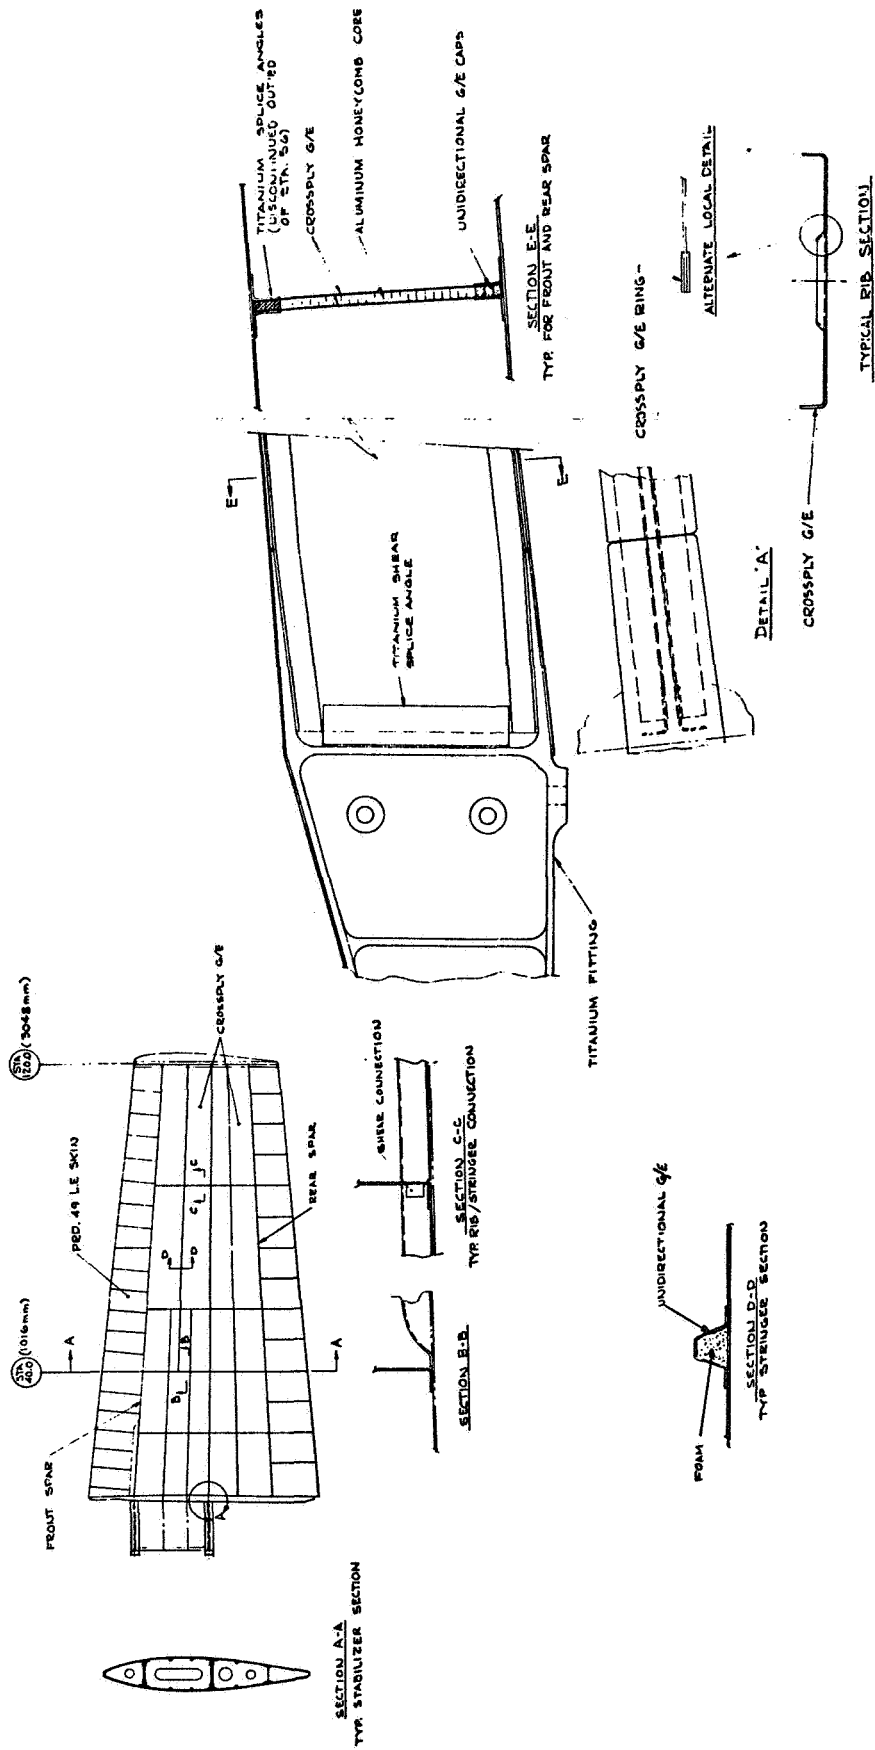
COMPOSITE HORIZONTAL STABILIZER STRUCTURE.
